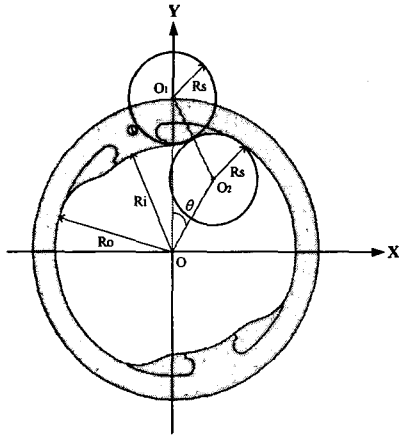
Kinematics analysis of the hydraulic rotor block for a knuckle crane
